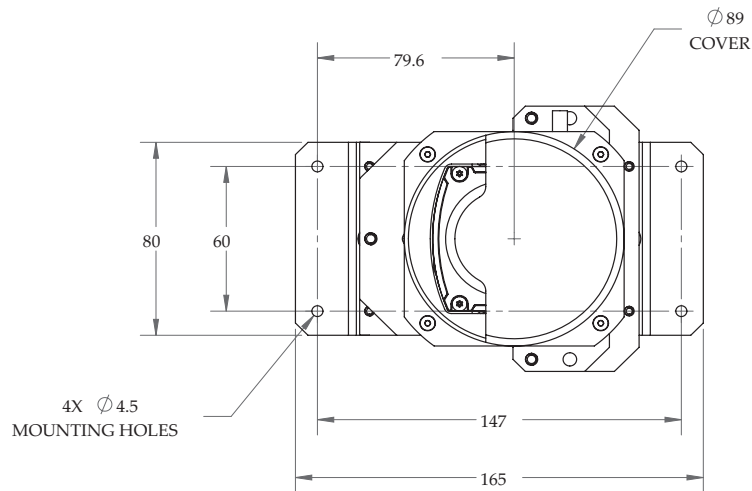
Side laser assembly top view dimensions (units in mm)
